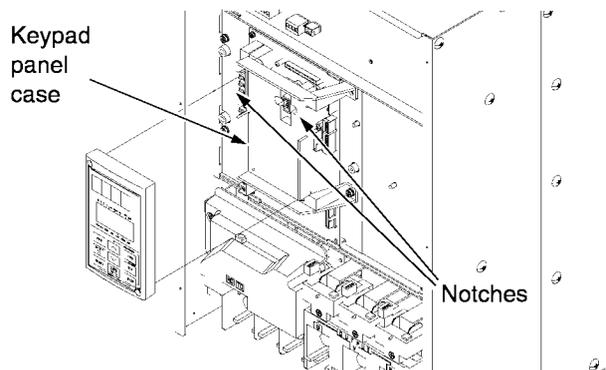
Removing the keypad panel (for inverter of 30 kW or more)
